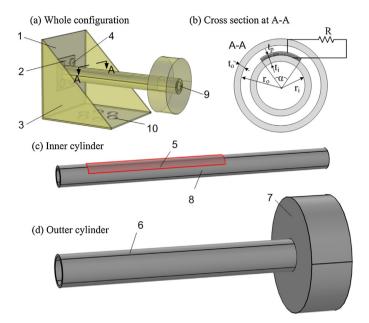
(a) Schematic diagram of the double-wall cylindrical energy harvesting device, which includes: 1, L-shape fixture; 2, connecting plates used to connect outer cylinder with the fixture; 3, ribbed plates to enhance the stiffness of L-shape fixture; 4, screws to co-axially match the outer hollow cylinder with inner cylinder; 5, piezoelectric cylindrical patch; 6, outer hollow cylinder; 7, proof mass of outer cylinder; 8, inner hollow cylinder; 9, proof mass of inner cylinder; 10, screw holes to connect the assembled platform with vibrating shaker. (b) Cross-section at position A–A shown in Fig. 1(a), where R_i , R_o , α , t_i , t_p and t_o denote inner wall radius, outer wall radius, curved angle of piezoelectric layer, inner wall thickness, piezoelectric layer thickness, and outer wall thickness, (c) inner cylindrical shell and (d) outer cylindrical shell.
